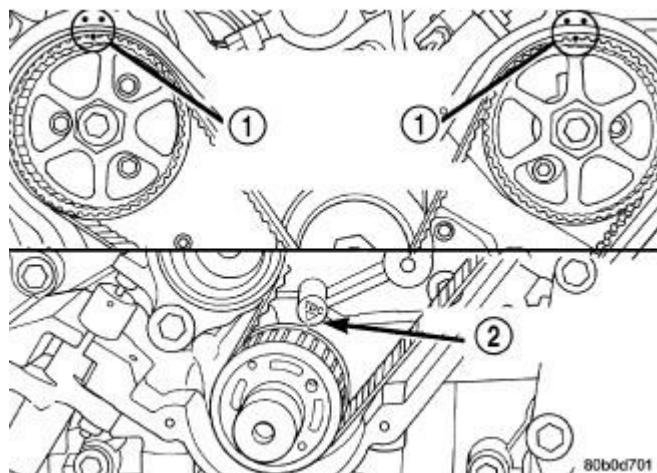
CAMSHAFT SPROCKET TIMING MARKS
